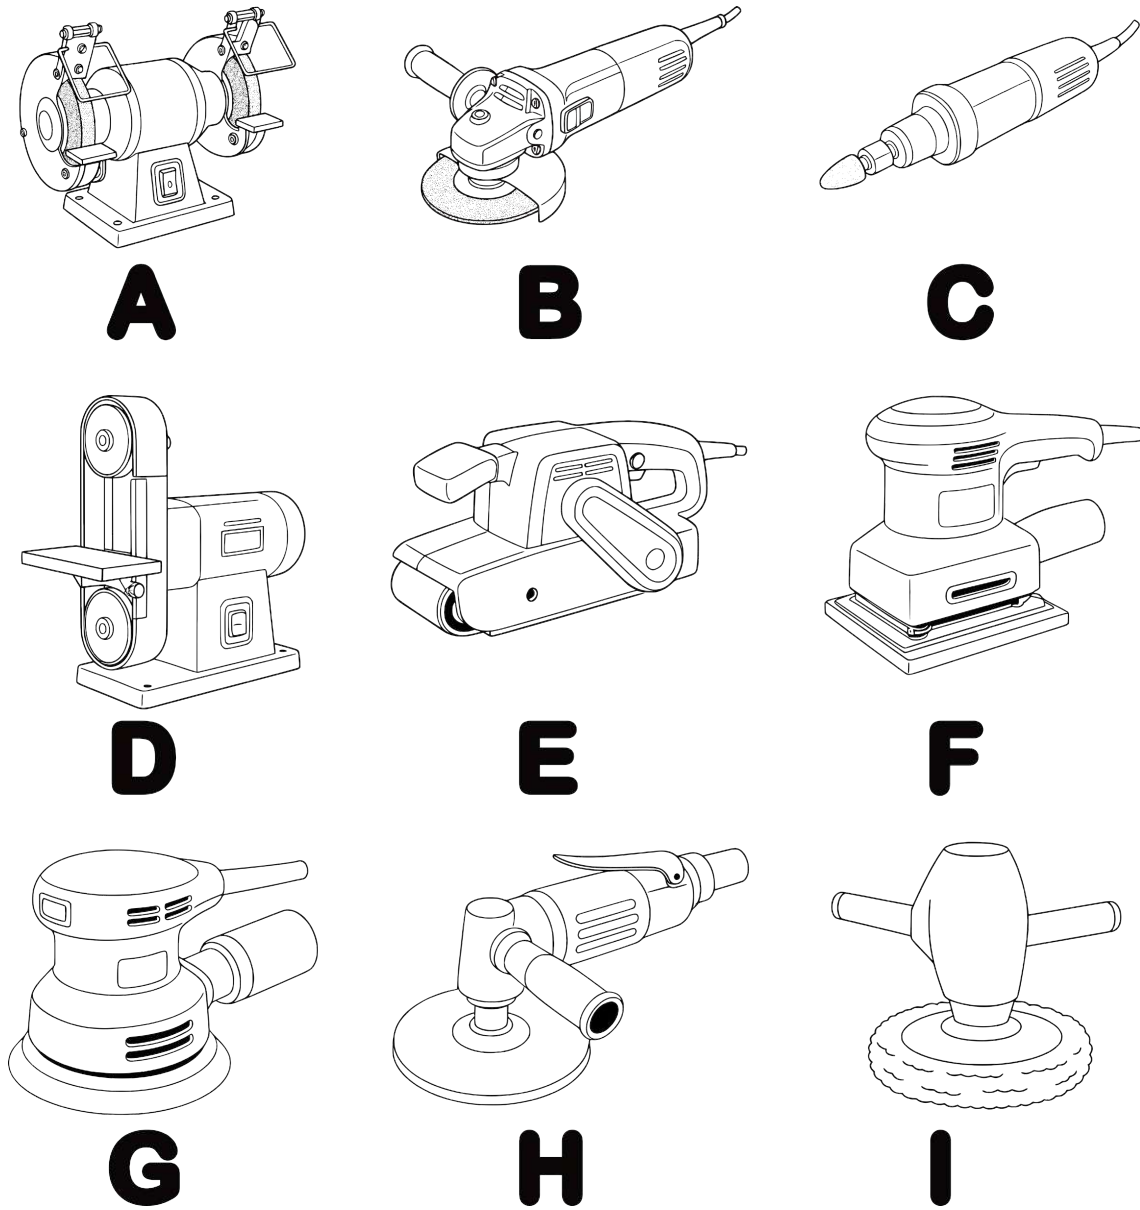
Few Important Surface Finishing Tools which are extensively used in Grinding, Sanding and Polishing operations. (a) Bench Grinder, (b) Angle Grinder, (c) Die Grinder, (d) Stationary Belt Sanding Machine, (e) Hand Sander, (f) Jitterbug Sander, (g) Orbital Sander, (h) Right Angle Sander, (i) Vertical Polisher.
